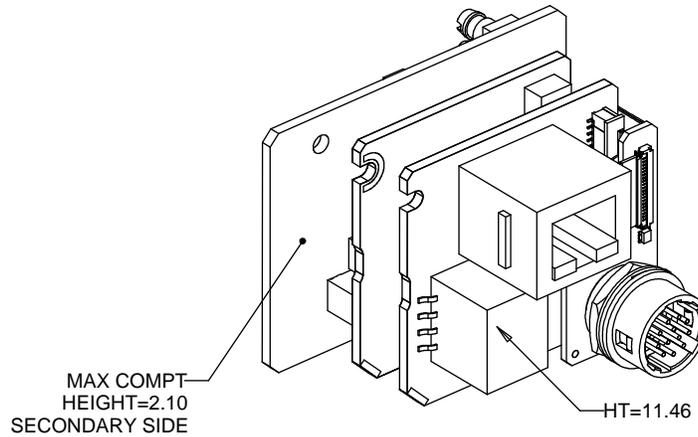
OEM Board Set with GPIO: Component Height Adapter Board
